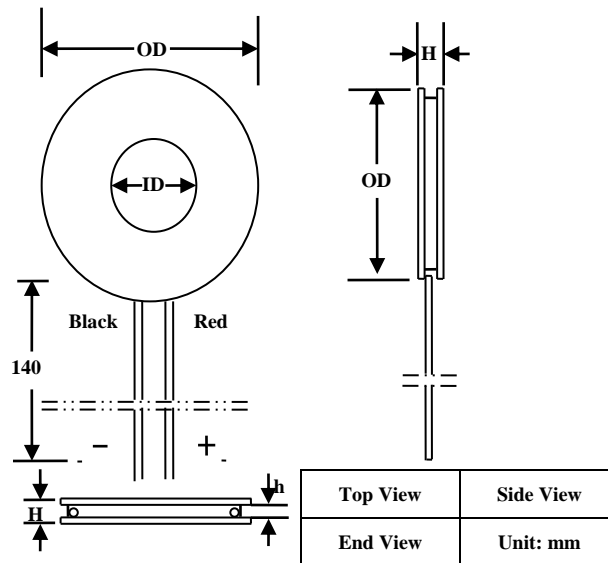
Mechanical Dimensions of Sealed ATEC1-49
